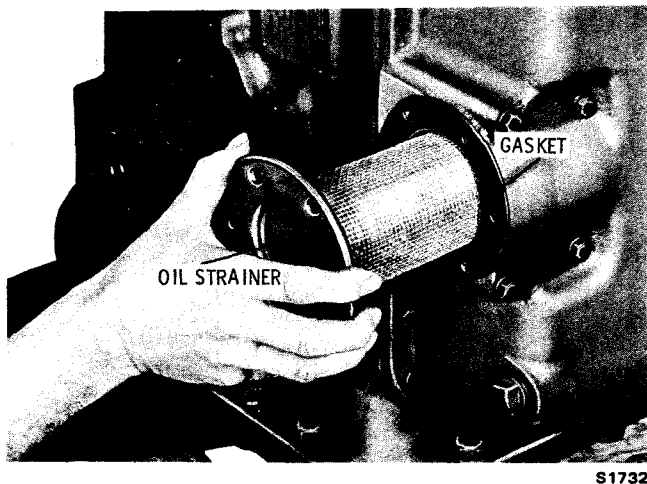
Installing oil strainer assembly (straight-through models)
